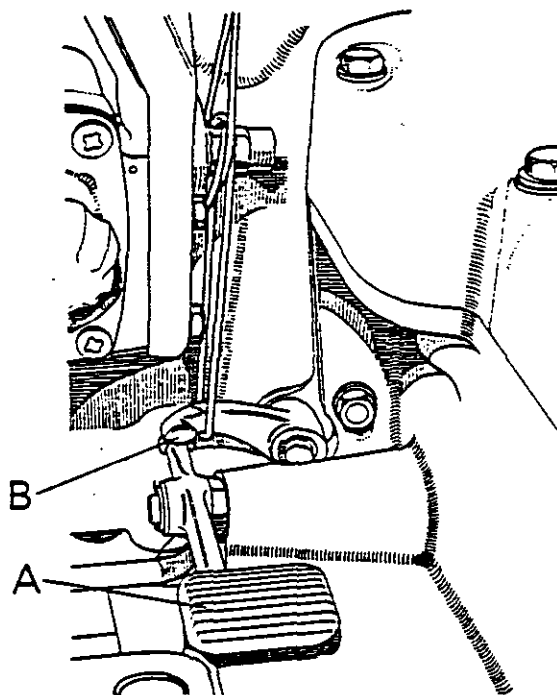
DIFFERENTIAL LOCK PEDAL WIRED IN ENGAGED POSITION
